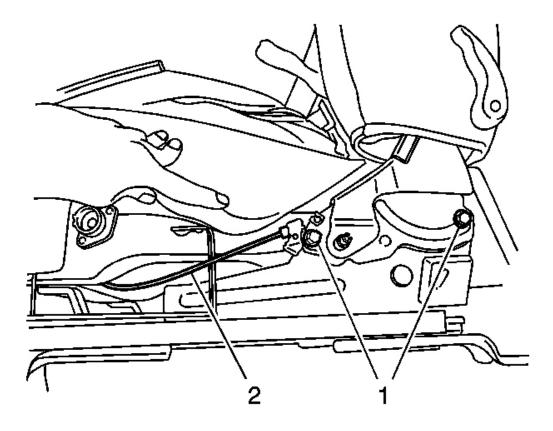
View Of Seat Recliner Bolts Courtesy of GENERAL MOTORS CORP.
